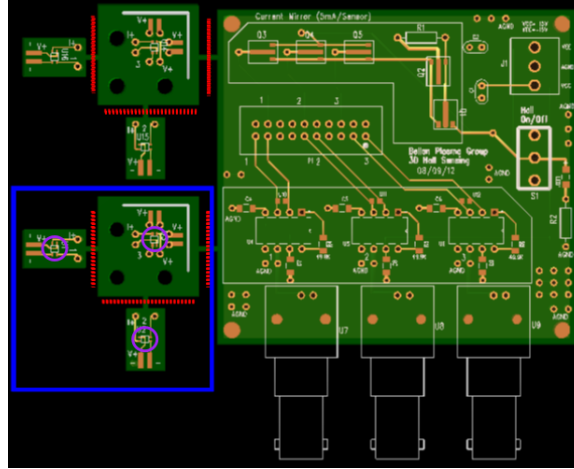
PCB representation of circuitry in Figure E.2. Both the control circuitry and the surface mounts for two 3-axis sensors are printed in the same board. The boards are cut along the dotted red lines. Hall elements are placed on the footpoints marked by the purple circle and the components enclosed in blue are assembled and placed perpendicular to one another like in Fig. E.5 (a).
